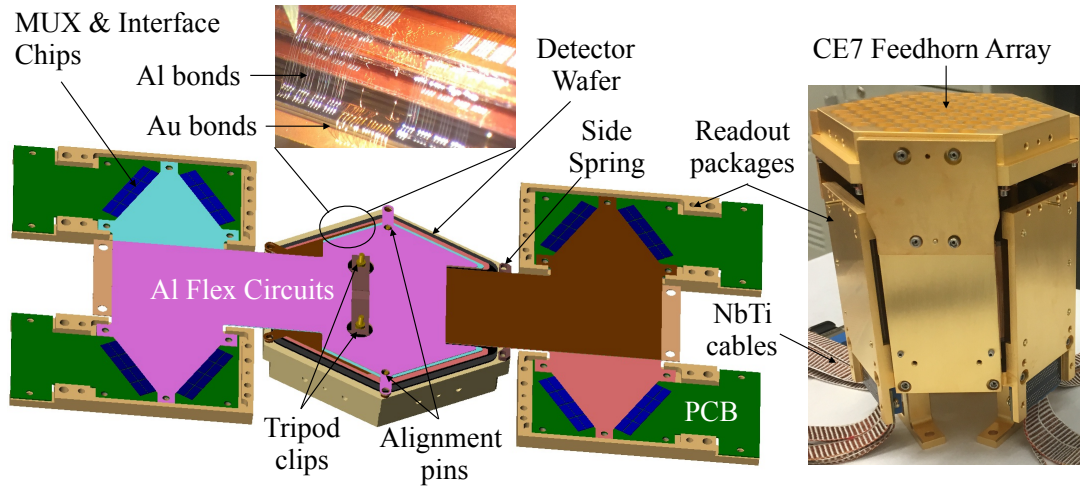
(Left) Model of unfolded HF module during assembly. The detector wafer (black) is mounted on top of Au-plated CE7 feedhorn array using two BeCu tripod clips. Four layers of Al flex circuits with decreasing circumradius (starting from bottom: coral, brown, light blue, and pink) are stacked on top of the wafer and connected to separate readout packages. These packages contain MUX and interface chips (blue) mounted onto a PCB (green) sandwiched between two Nb sheets (not shown). The inset shows intricate layers of Al bonds from the wafer to different flex circuit layers (the topmost layer is not visible here). Au bonds heat sink the detector wafer to the feedhorn array. (Right) An assembled HF module. After assembly, all four readout packages are folded up and bolted to the CE7. Support structures are bolted to the bottom through a backplate. Refer to Appendix A for a detailed discussion on the assembly procedure.
